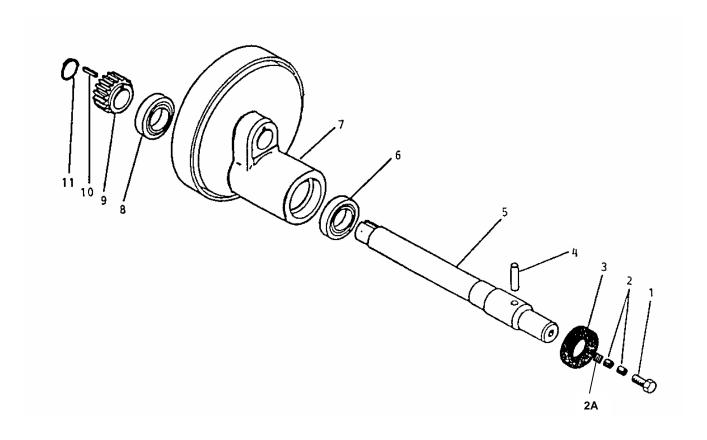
PLANETARY & BEATER SHAFT ASSEMBLY
